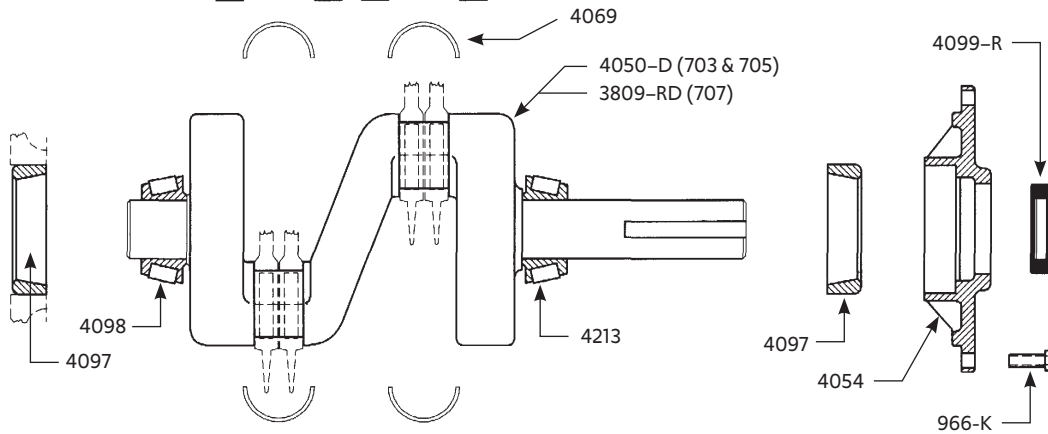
PISTON AND CRANKSHAFT ASSEMBLY PARTS LISTS
